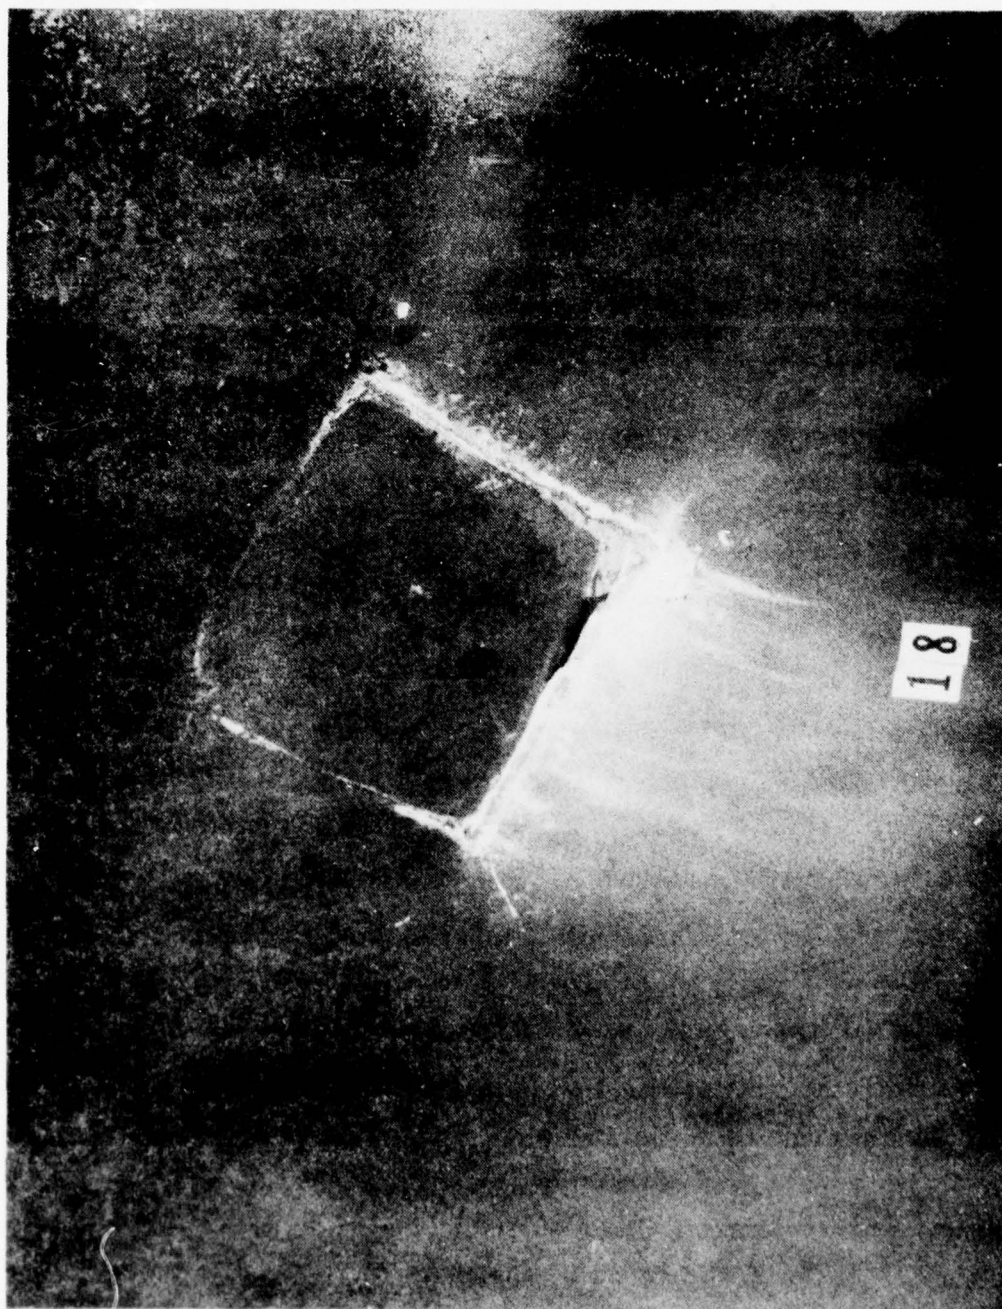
, Test No. 18, 0.25-in. Thick Mild Steel Target — Closeup
